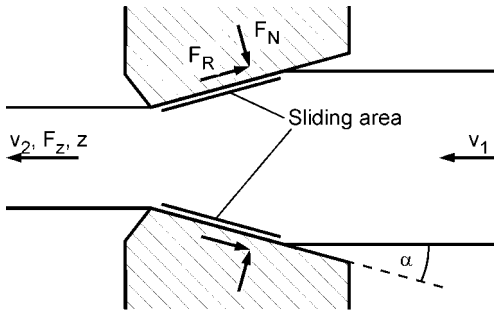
Friction and drawing tension when drawing wire. v_1 = initial speed; v_2 = final speed; F_z = drawing force; F_N = normal force; σ_z = drawing tension; F_R = friction force; k_f = average deformation resistance; ϵ = reduction of cross section; α = half reduction angle (drawing angle); μ = average friction coefficient.
